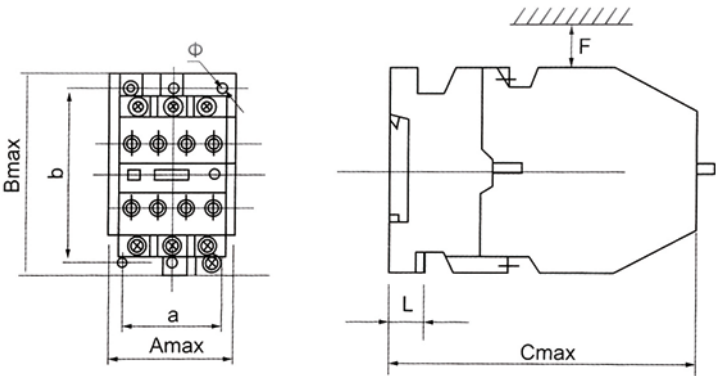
CJ20-10, 16, 25 shape and installation dimensions
